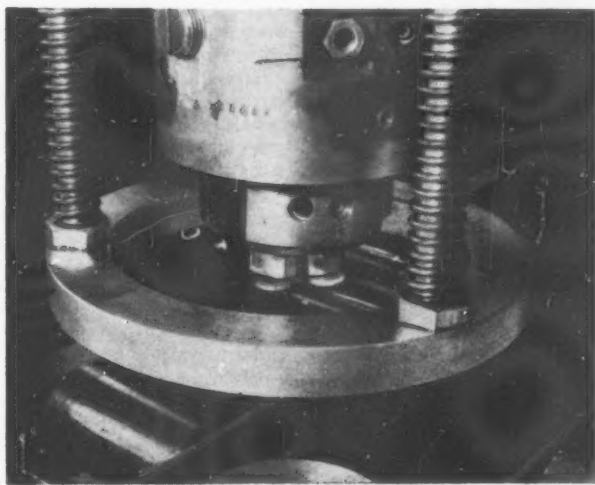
An Internal Burnishing Tool with Three Carbide Rollers is Employed to Finish the Bores of Hubs on Torque Converter Assemblies
